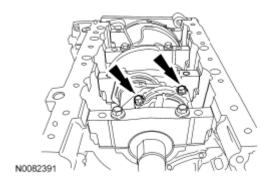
Locating Connecting Rod Cap Bolts Courtesy of FORD MOTOR CO.
